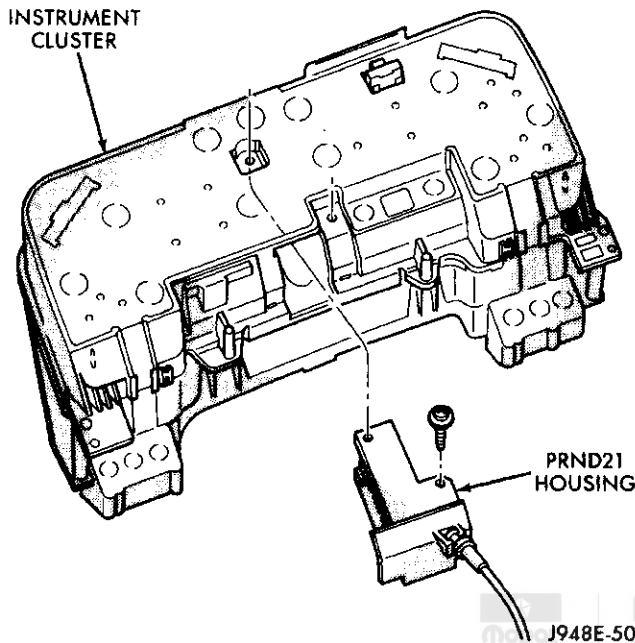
Gearshift Selector (PRND21) Indicator Housing Remove/Install
